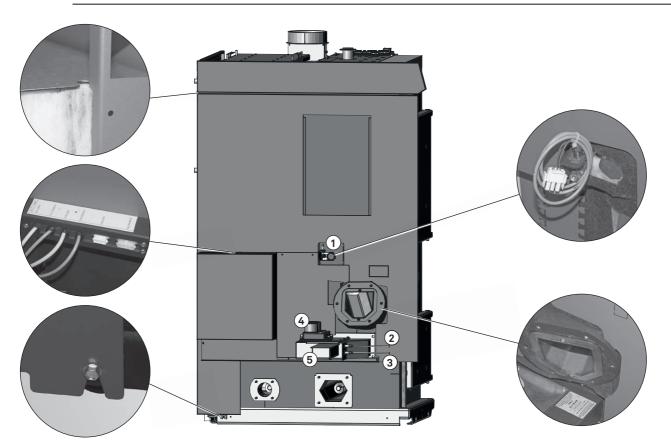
Installing the left side panel (Illustration PuroWIN PWPE 60)
